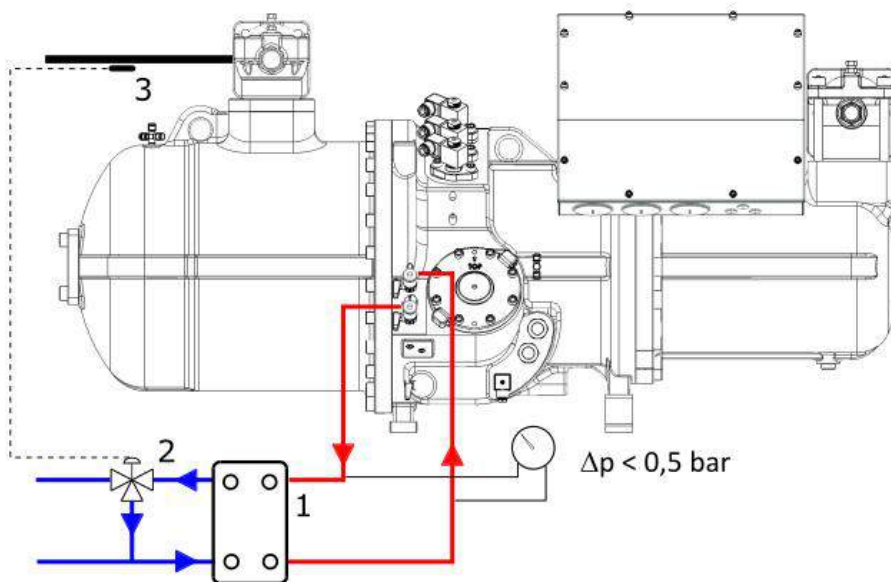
D: cooling example 1) water heat exchanger; 2) modulating 3-way valve; 3) thermal switch on discharge tube of the compressor
